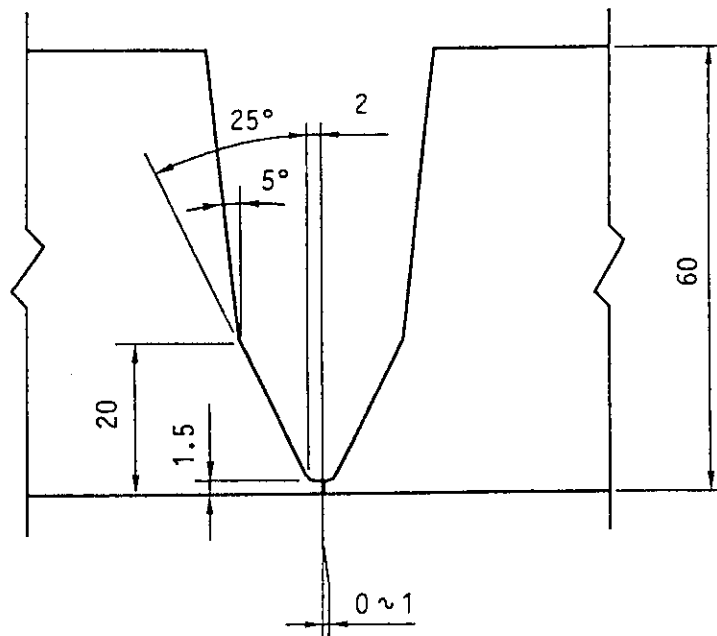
Groove geometry (thickness: 60mm plate)
